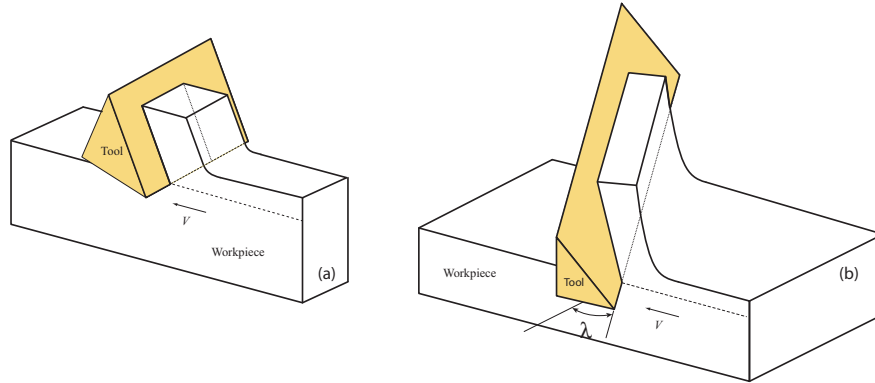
Basic machining geometries (a) Orthogonal machining, and (b) Oblique machining.
